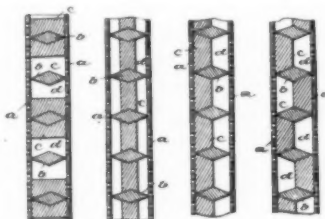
STORAGE BATTERY PLATE CONSTRUCTION.
